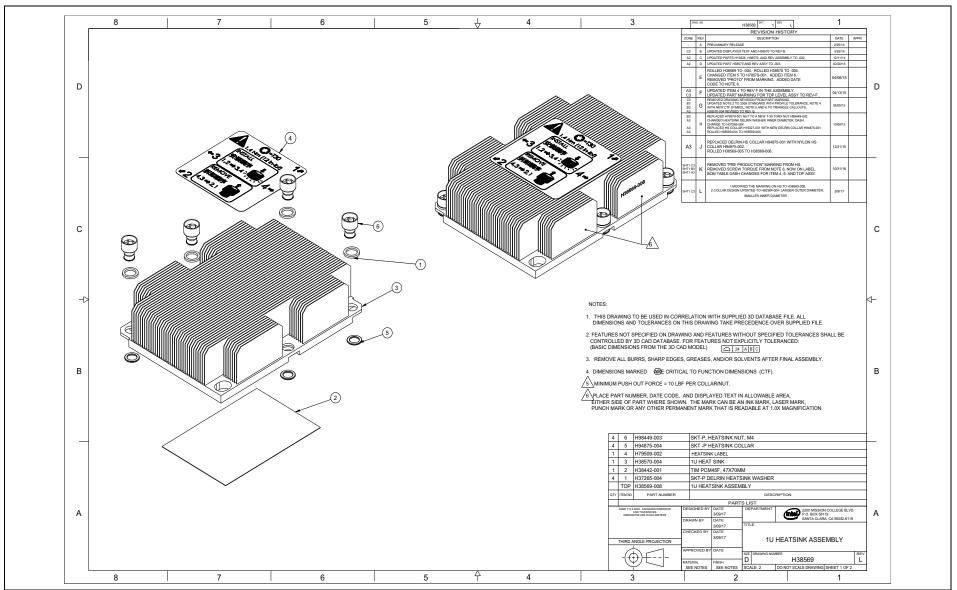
1U Heatsink Assembly (Sheet 2 of 2)
